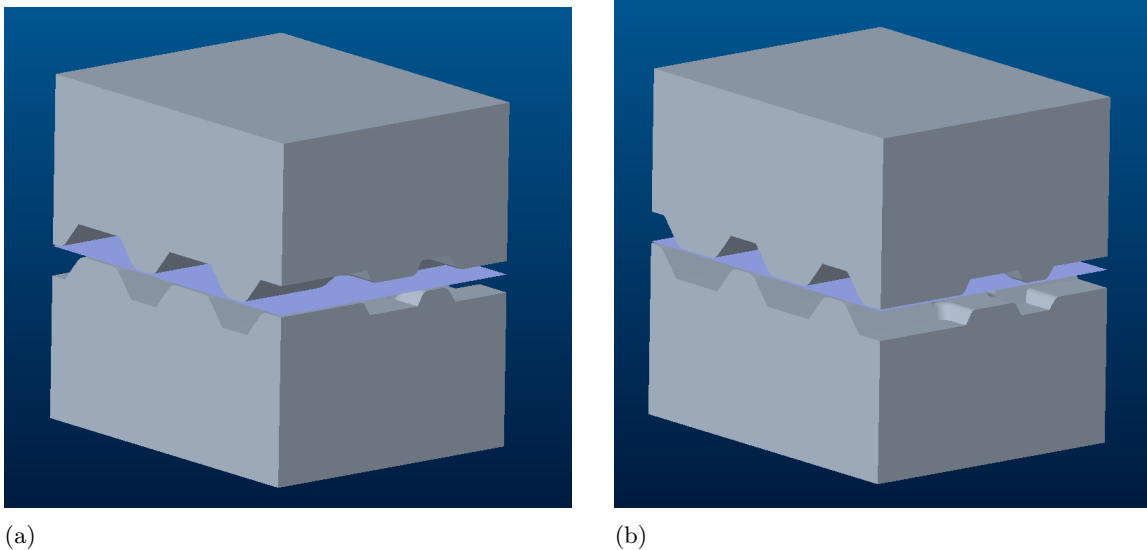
Forming tools for the closed side (figure a) and open side (figure b) of the diagonal groove
